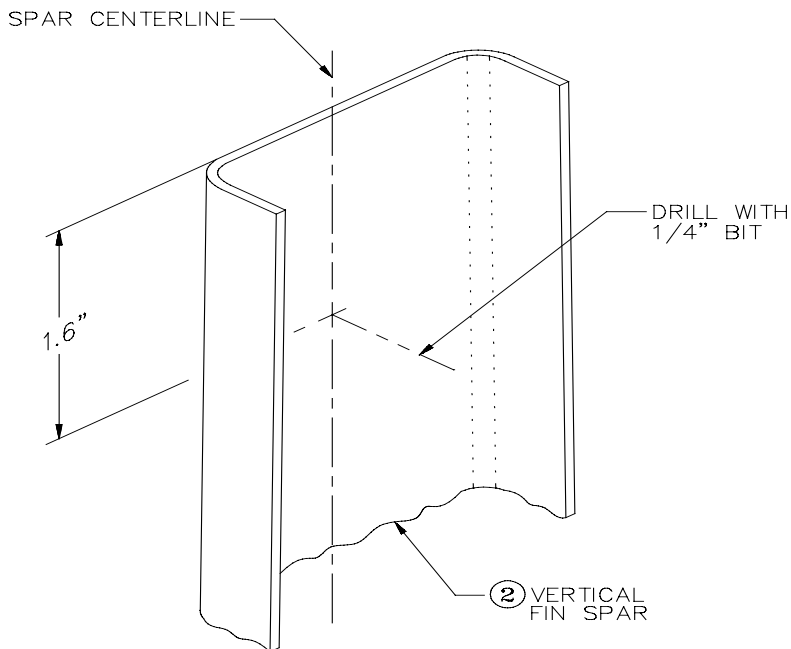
Marking and Drilling the Initial Upper Rudder Hinge Hole
